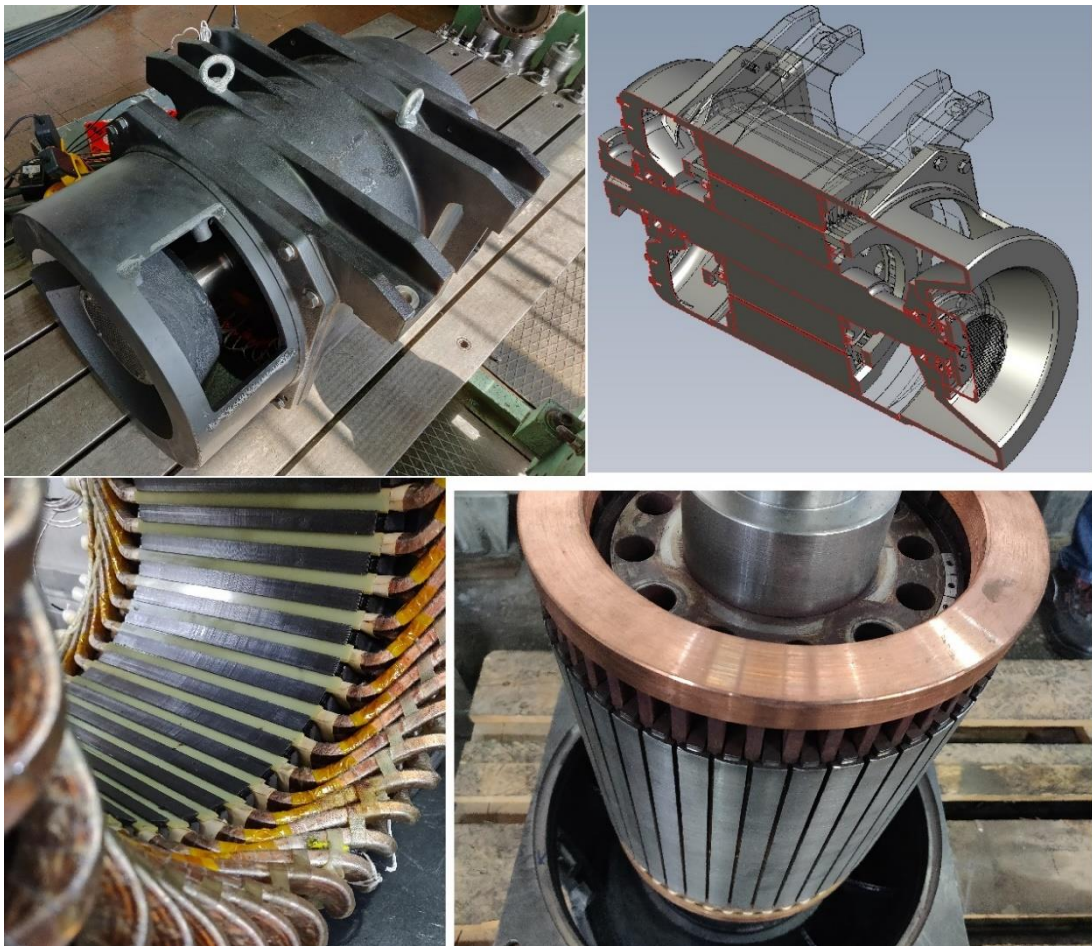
Top Right : 3D Model of the Motor, Top Left: Completed Motor, The Fan Intake is Visible-No Fan is Connected, Bottom Right: Rotor Core and Rotor Cage, The Rotor Short Circuit Ring and Rotor Cooling Channels are Visible, Bottom Left: Stator Core and Flat Type Windings are visible
